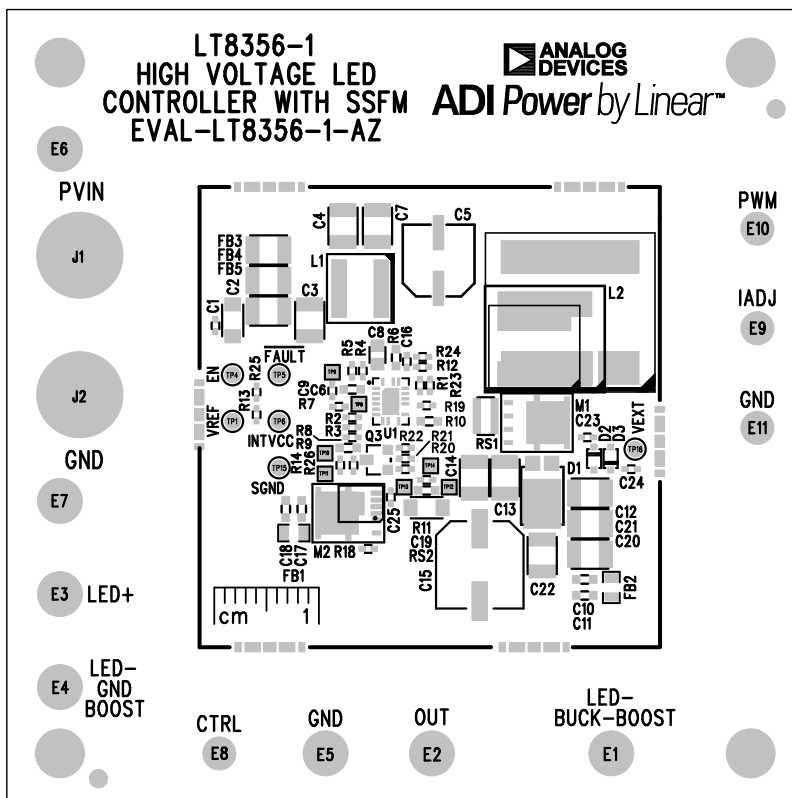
EVAL-LT8356-1-AZ Top Silkscreen Outlining Placement of Shield Clips and EMI Shield on PCB
